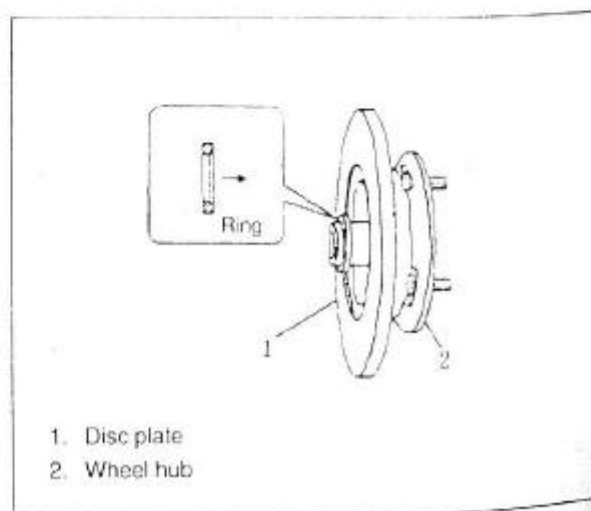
D — 20 DISC PLATE, WHEEL HUB
